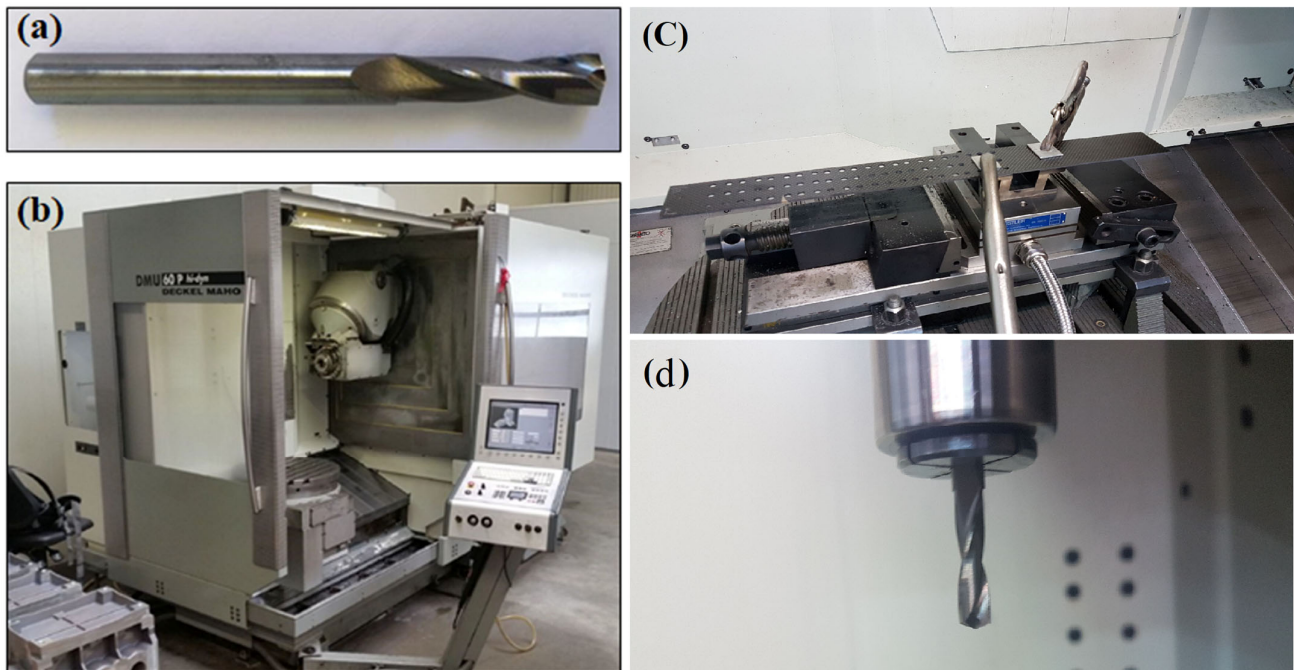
(a) Drill bit. (b) Universal machining center. (c) Clamping of the sample. (d) Fixing the drill in the tool holder.
